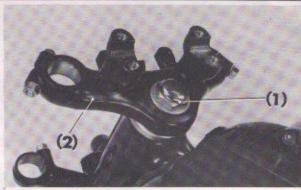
(1) Steering stem nut (2) Fork top bridge
